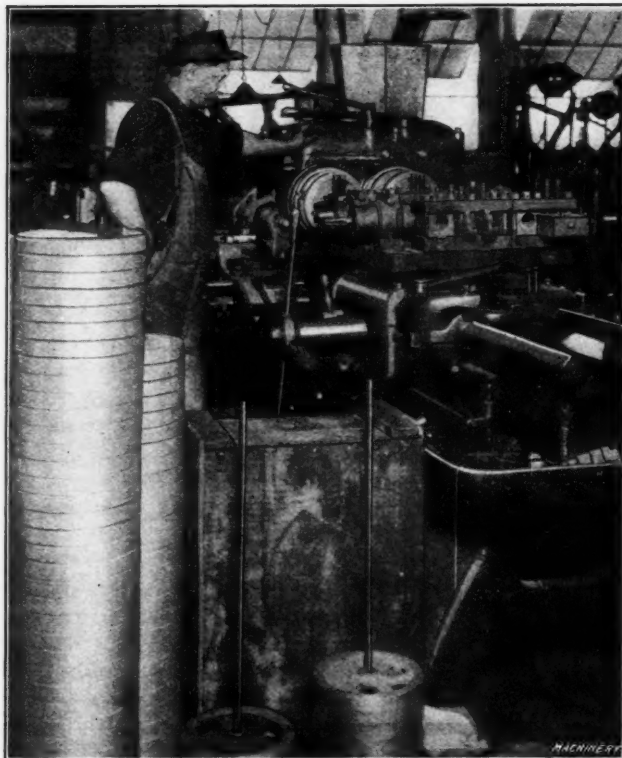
Machining a Motor Cycle Flywheel on the Double-spindle Flat Turret Lathe
